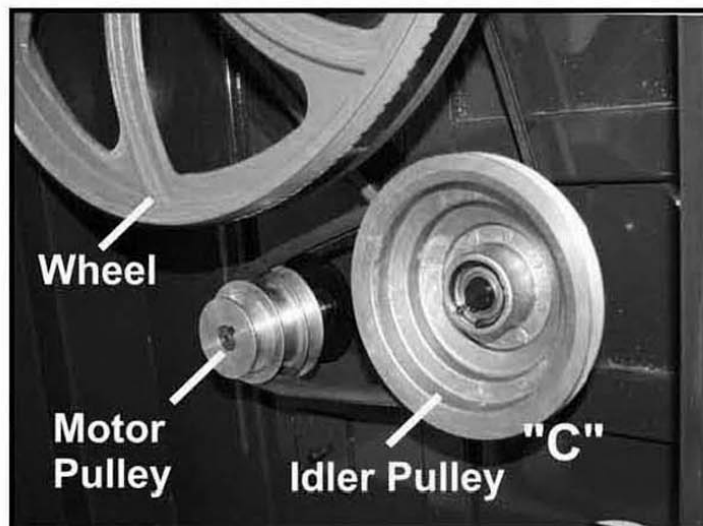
Shows the Pulleys and the Wheel Inside the Cabinet
